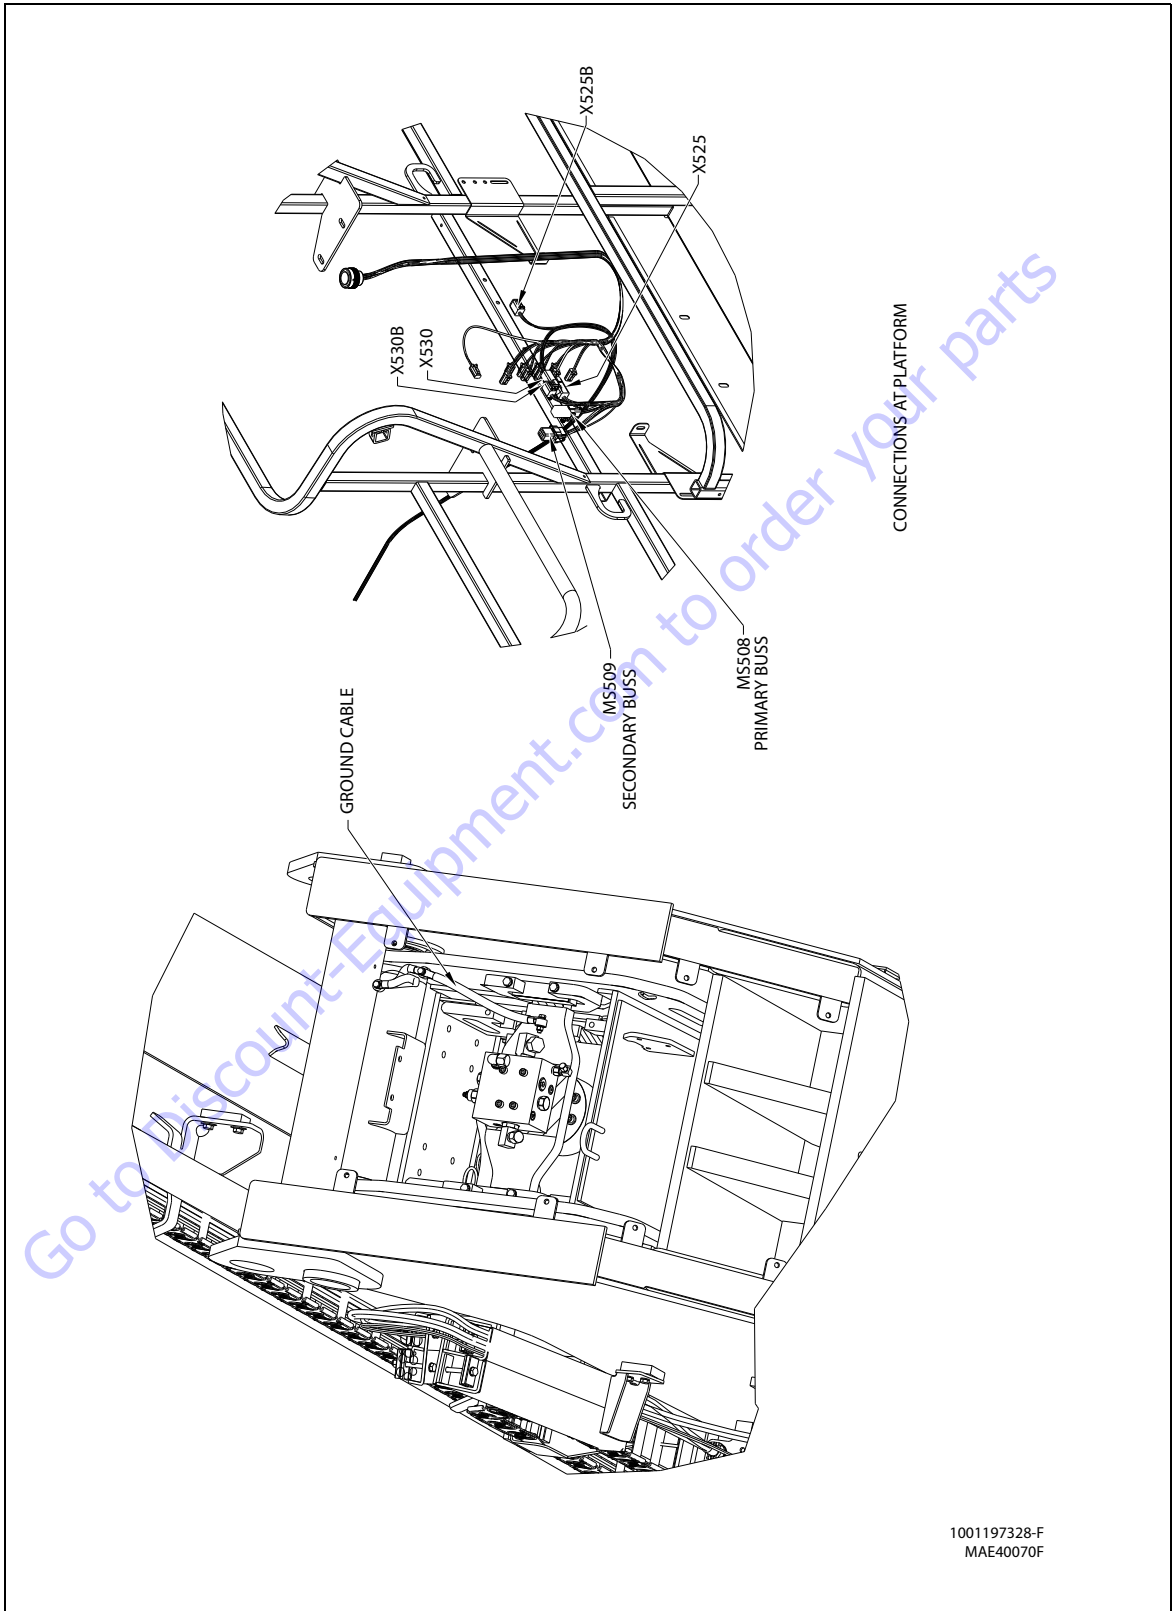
Boom Electrical Installation (SkyPower) - Sheet 5 of 6
